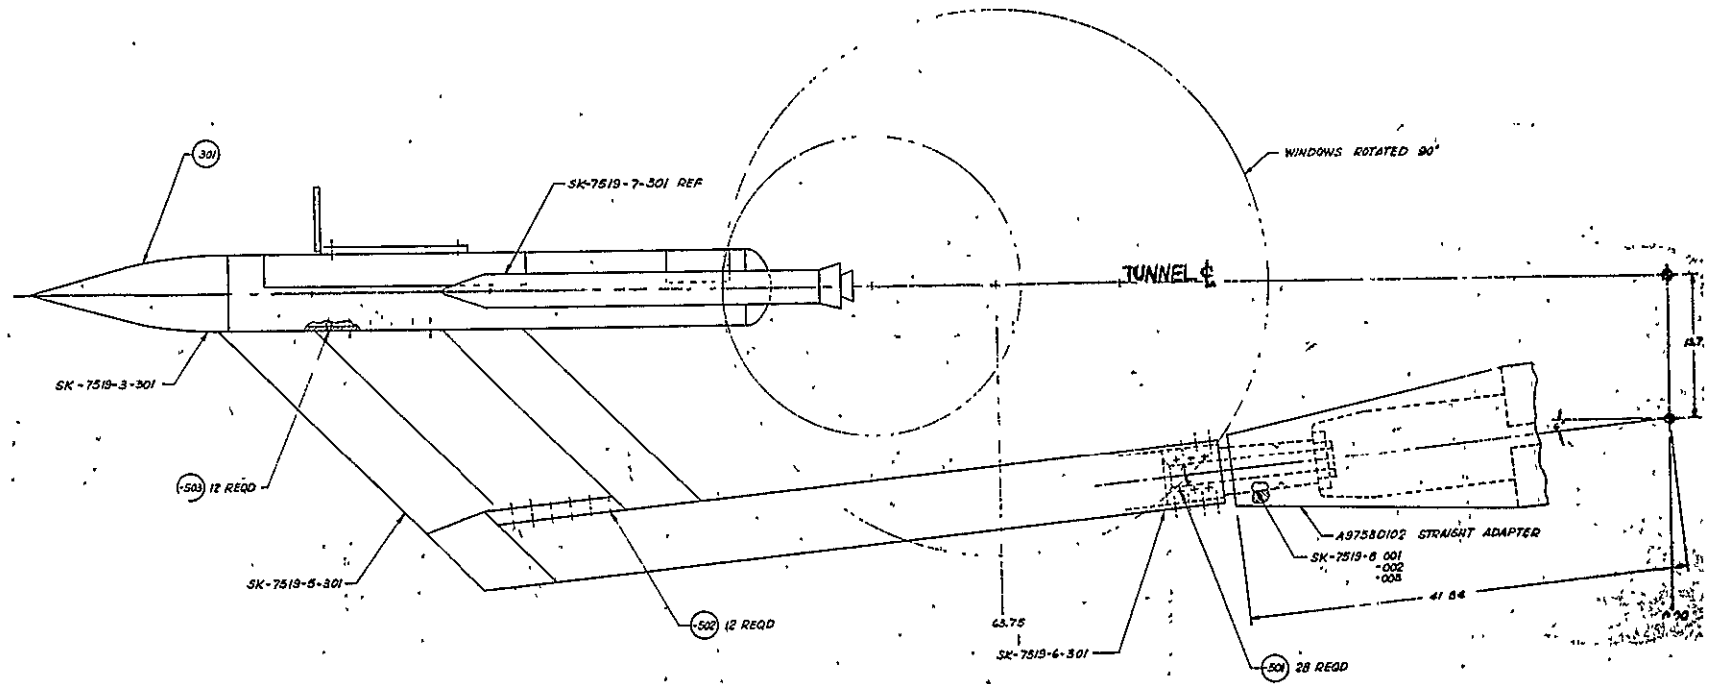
(a) MODEL INSTALLATION IN 9x7 TUNNEL (PLAN VIEW)
